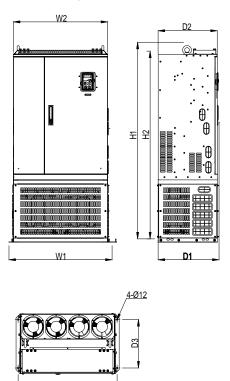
Single-unit installation dimension for 380V 280–315kW and 660V 355 kW models
